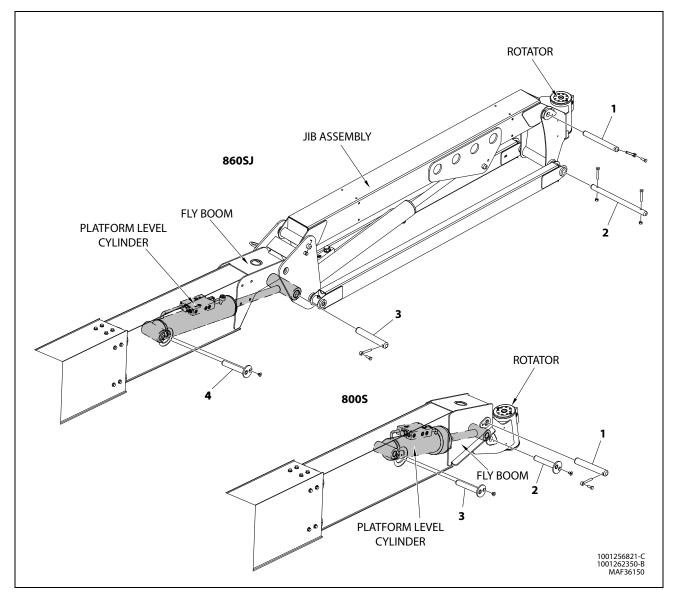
Removal/Installation of Components - Rotator and Level Cylinder
